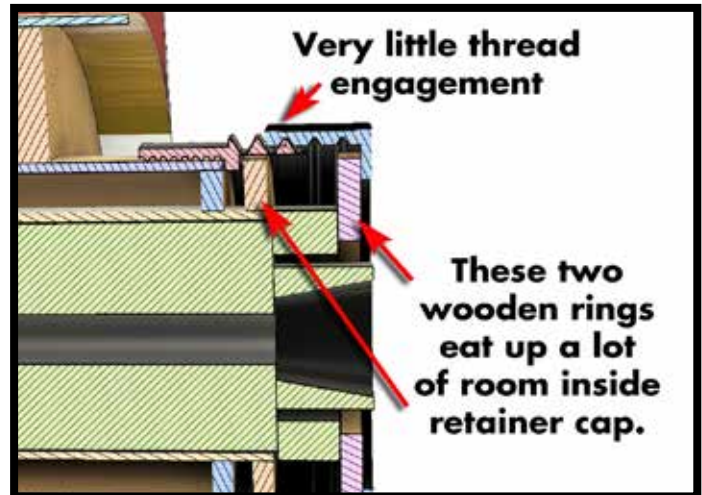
A homemade motor adapter that is a copy-cat of the aluminum motor adapter.
